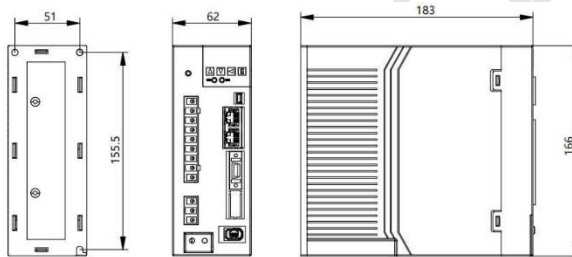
RT20-EA015H/020H Appearance and dimensions (Unit, mm)
